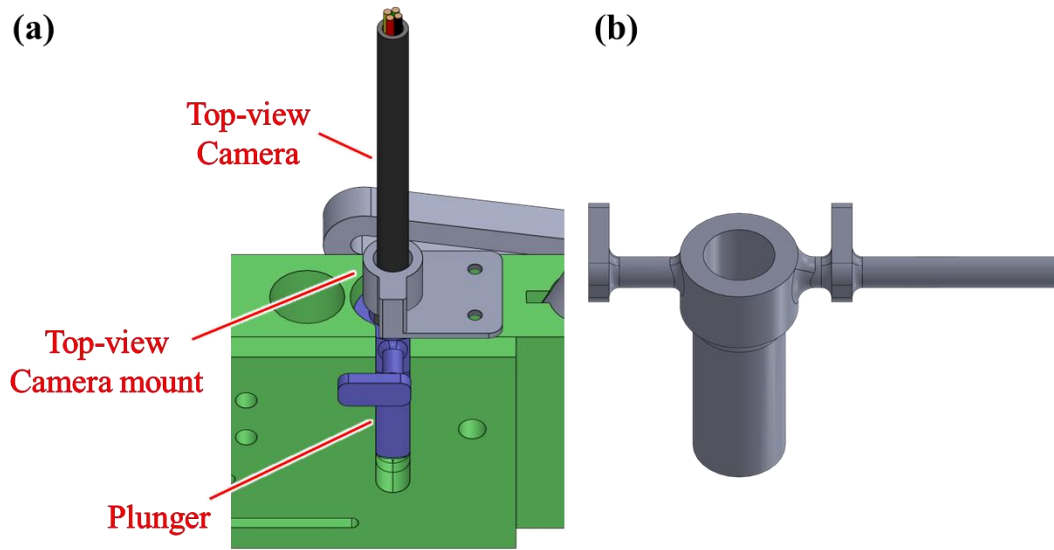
Components of the peg insertion tool. (a) Combined assembly of the plunger with the top-view camera, highlighting their positioning on the peg insertion tool. (b) Detailed view of the plunger.
